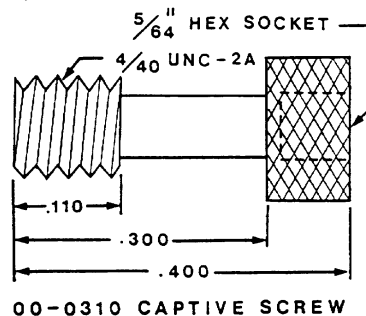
#4-40 captive screw for UG-383 and 387 flanges (from the Aerowave catalog). The material is 303 or 304 stainless steel and the unthreaded shank diameter is 0.078" + 0/-0.002". Dimensions in inches.
